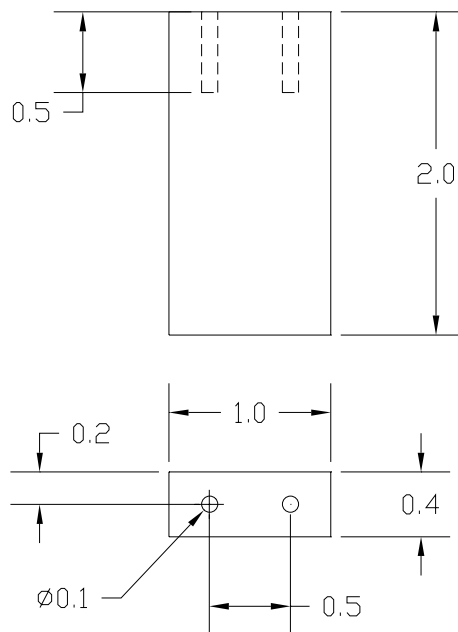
Adaptor piece for the grip of the Instron machine (dimensions in inches).
